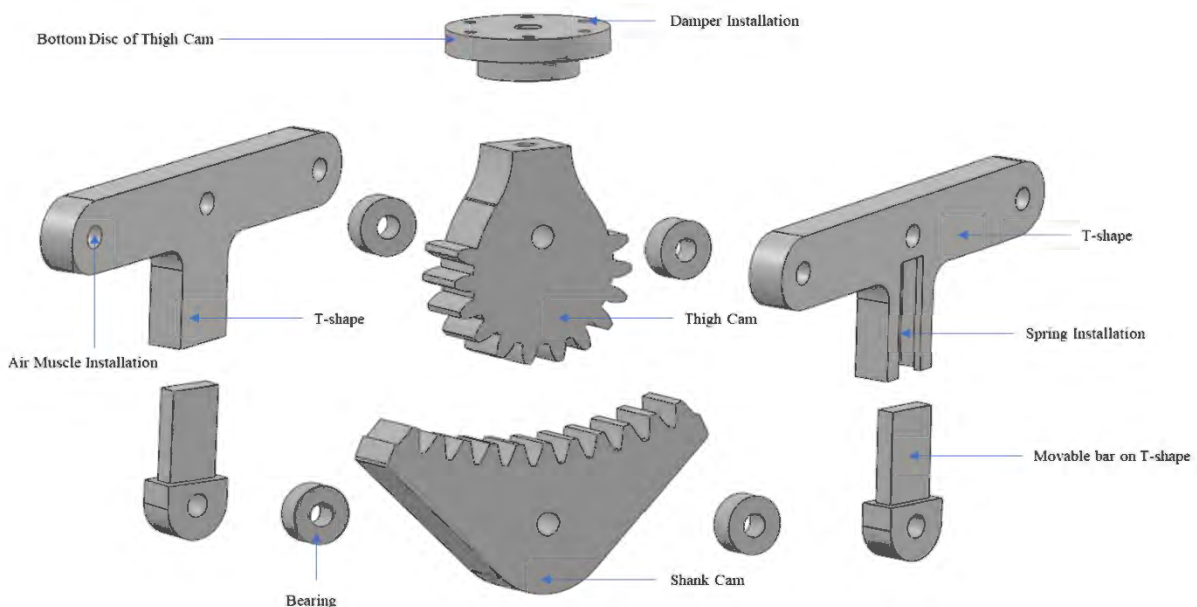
CAD design of the robot knee joint with toothed Cam Couple Mechanism.
